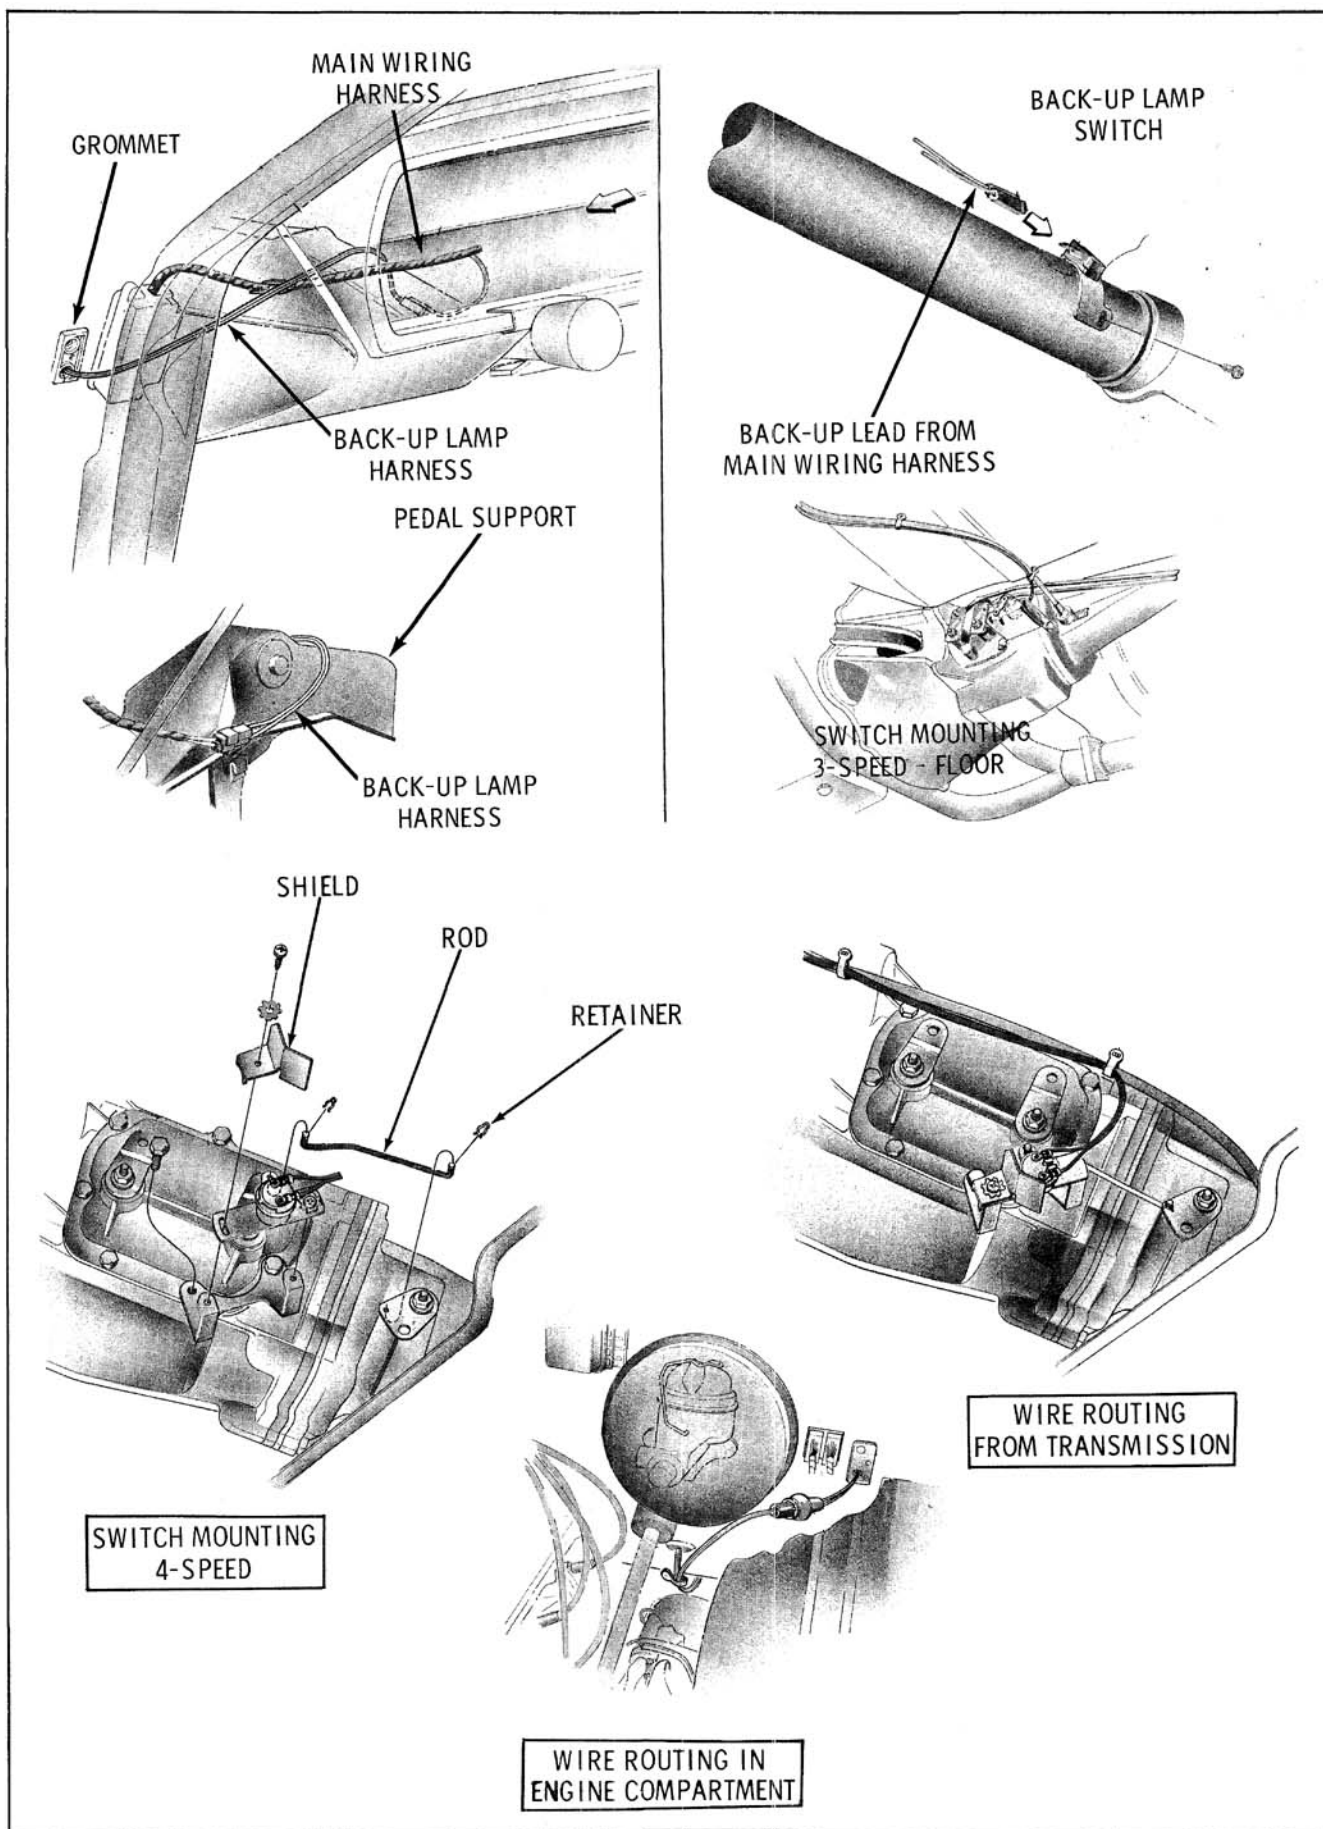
Back-Up Lamp Wiring and Switches (Floor and Column Shift)
